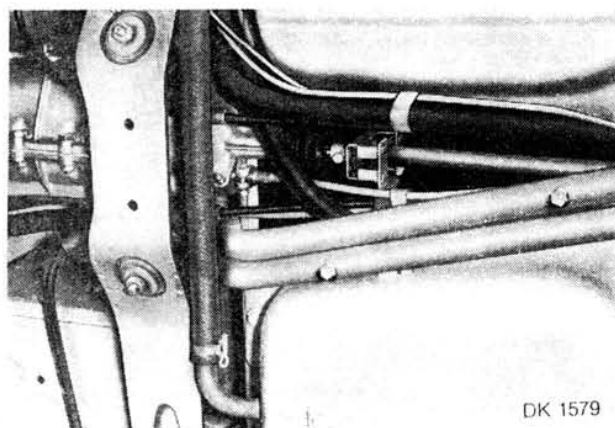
/2 - Overall View of Arrangement of Links, Pipelines, etc., under Fuel Tank
